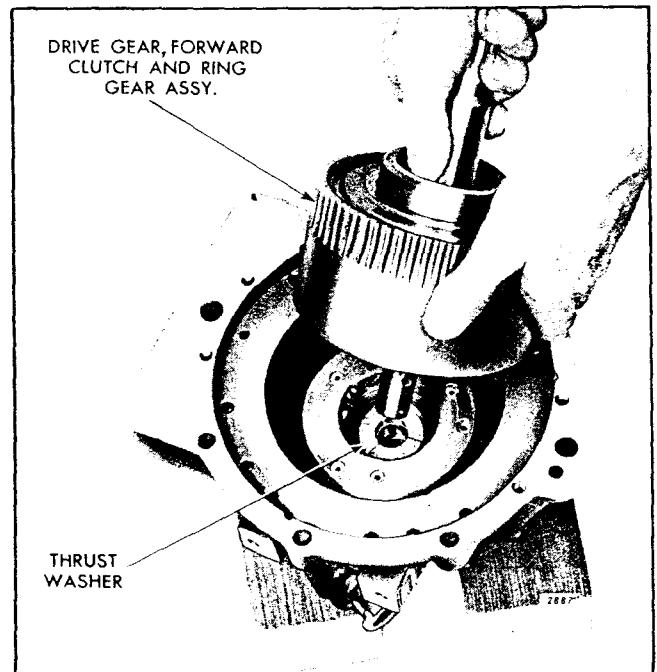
Installing Planetary Ring Gear, Forward Clutch and Drive Gear Assembly in Reverse Gear Housing
